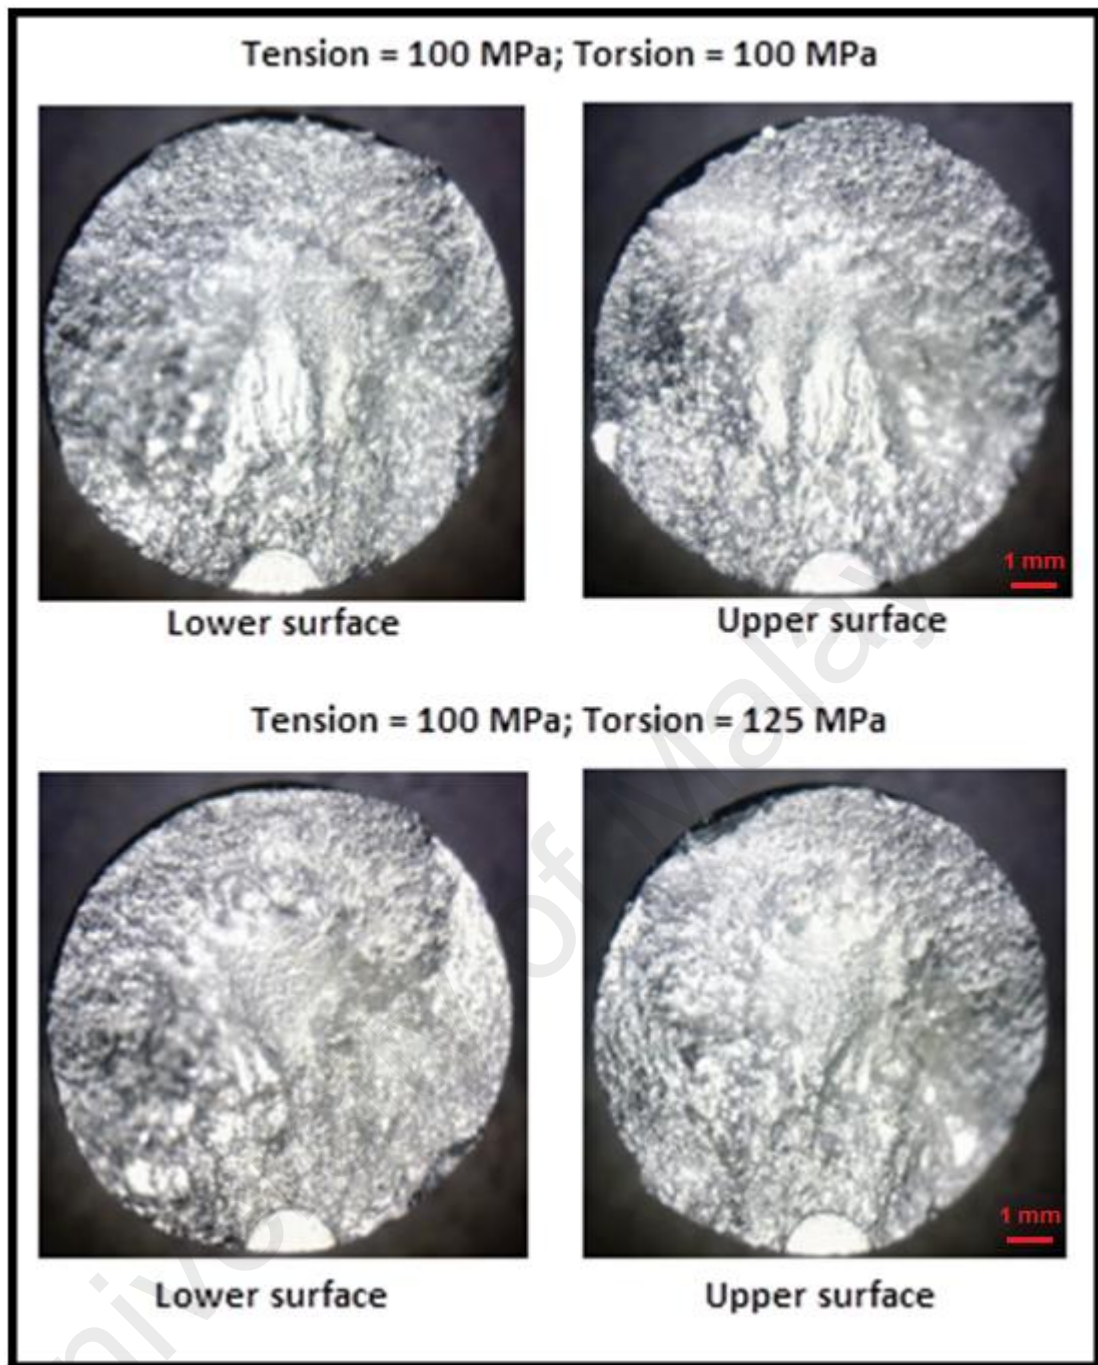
Fracture surface conditions of surface cracks ($a/c = 1$) on solid cylinder under combined tension-torsion loading.
